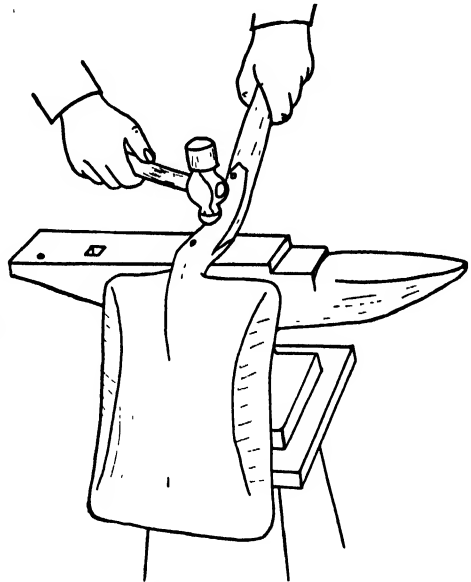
After fitting a new shovel handle, drill holes, insert rivets, and hammer the rivet heads down.
